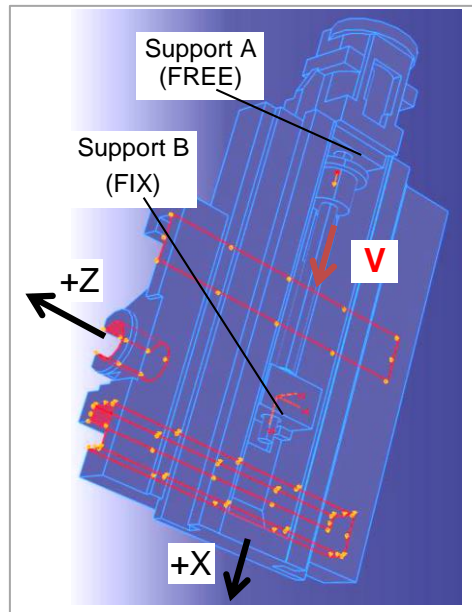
Interlinkage of drives Z and X in turning centre through machine tool bed slideways
